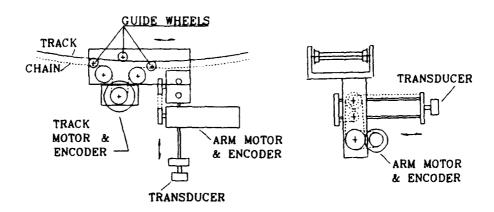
JT9D Motorized Scanner Track and Arm Mechanism
